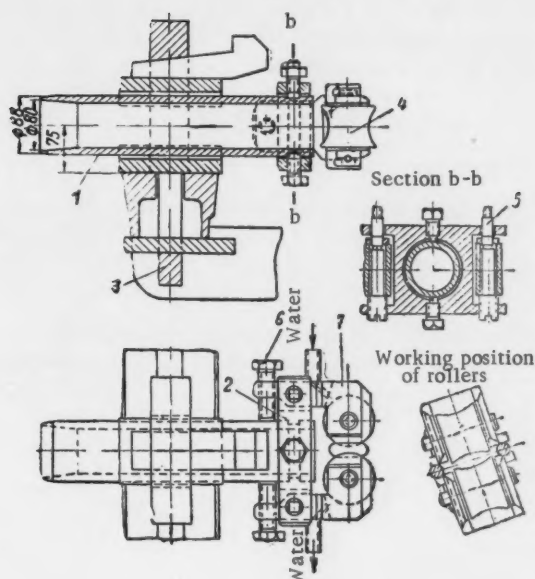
Exit tilting roller equipment for a continuous small section mill. 1) Tube; 2) tilting head; 3) frame; 4) rollers; 5) movable pivot; 6) adjustment screw; 7) roller holder.
